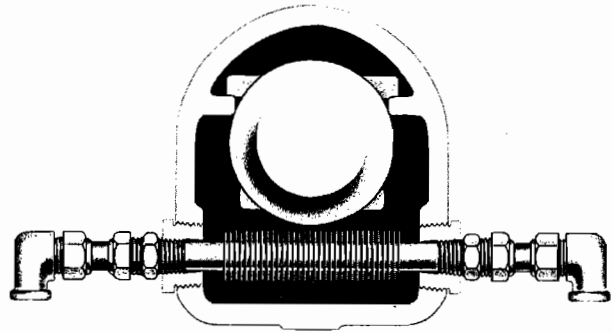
High Efficiency, High Temperature Bearing Frame Cooler.
